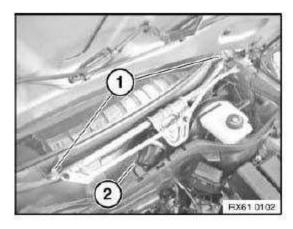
Identifying Wiper Bracket Screw Courtesy of BMW OF NORTH AMERICA, INC.
